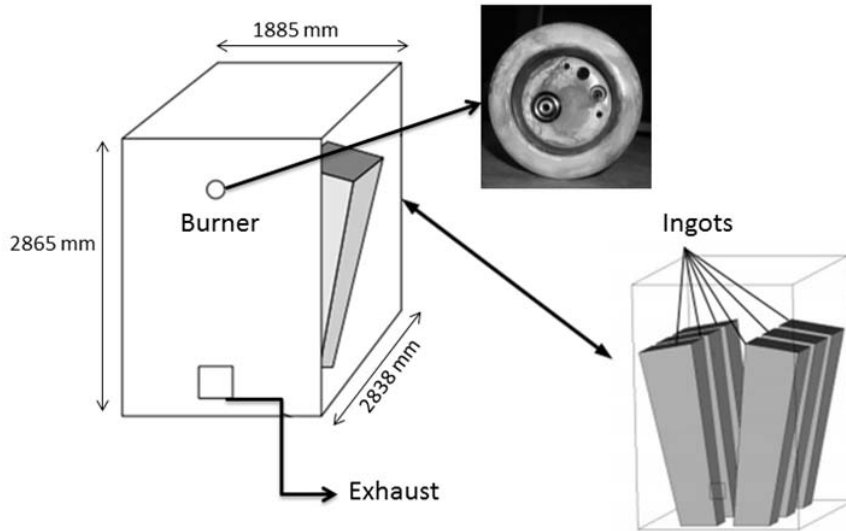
Soaking pit furnace configuration and arrangement of ingots inside the furnace (18)
